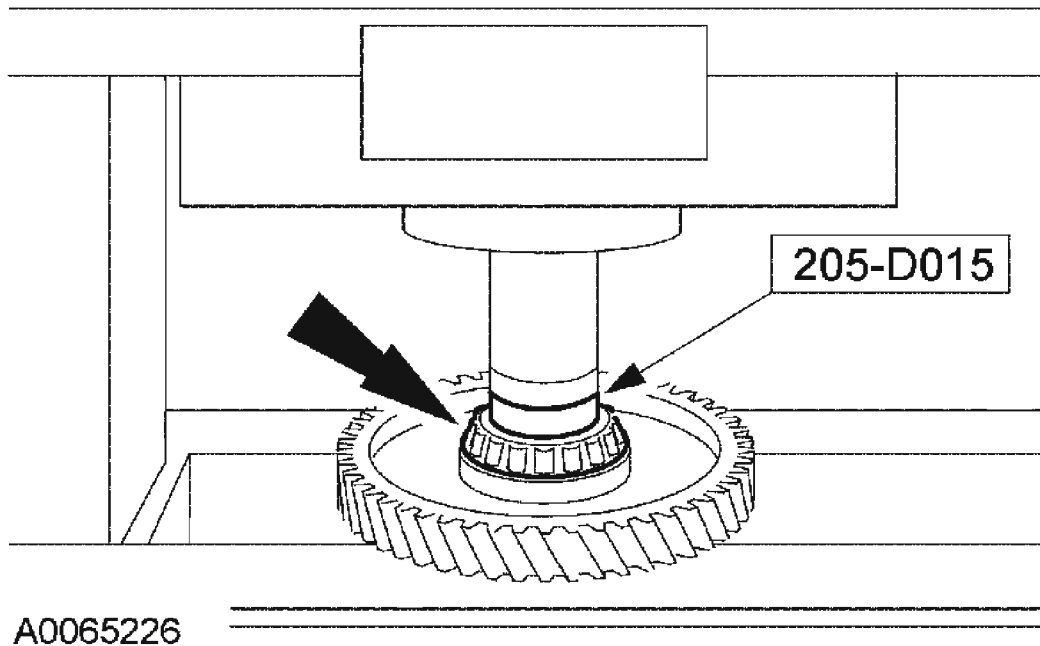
Removing Left-Hand Side Transfer Shaft Gear Bearing Using Special Tool And Press
